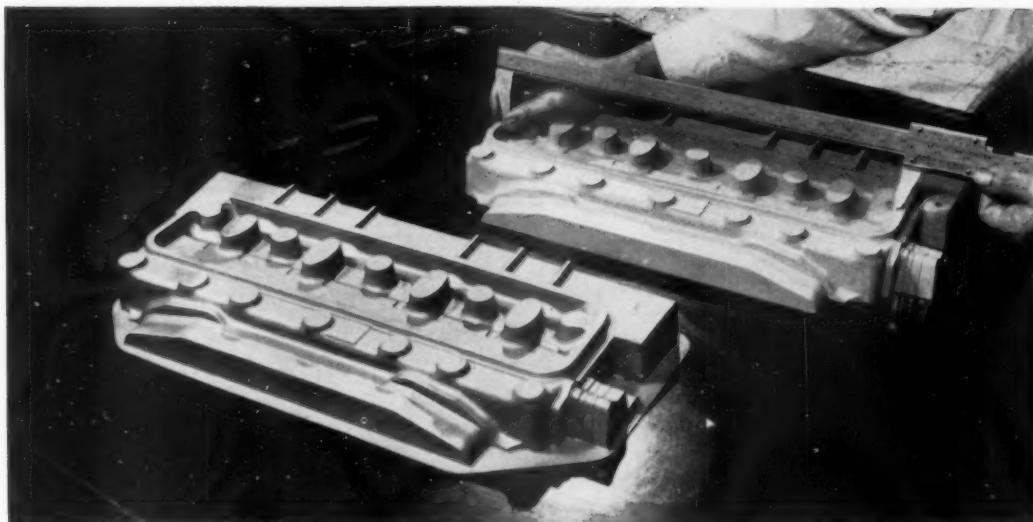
Final inspection of pure-nickel cylinder-head pattern (left) against master. This pattern was produced without machining.
